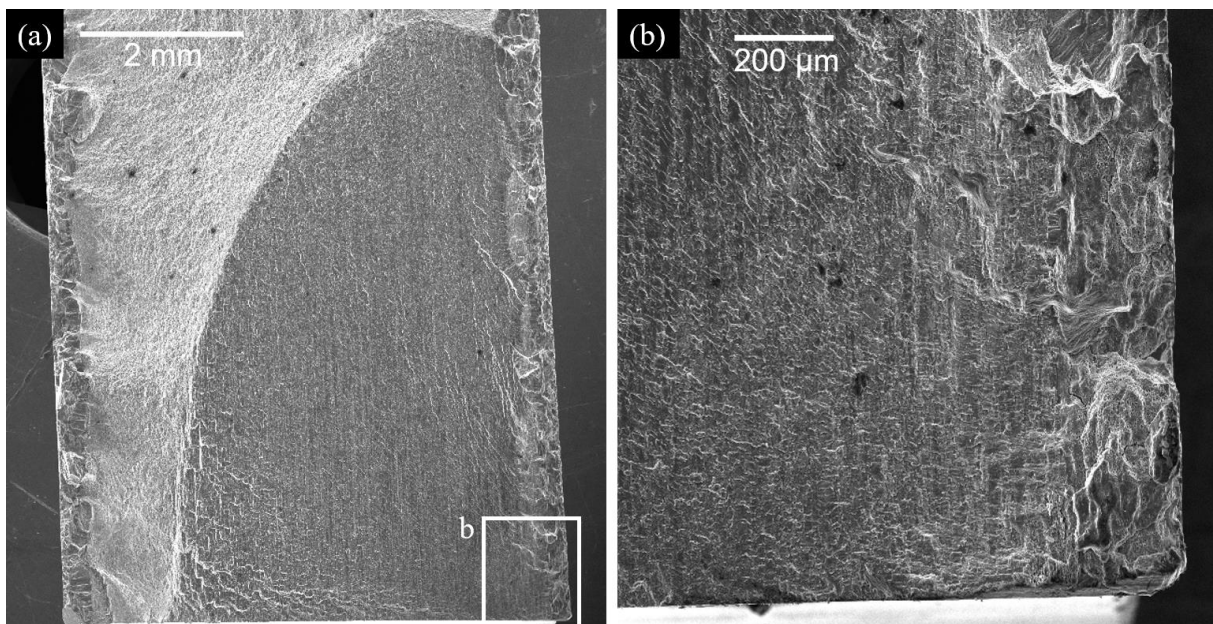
Fracture surface of as extruded specimen with 24 h pre-corrosion.
